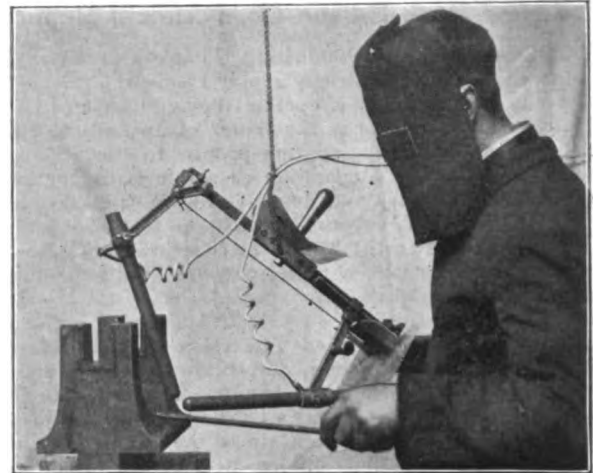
WORKMAN FILLING UP FLAWS IN IRON CASTING. (By means of carbon rod held in hand, small pieces of cast iron are pushed into the hole after metal in latter begins to run.)
